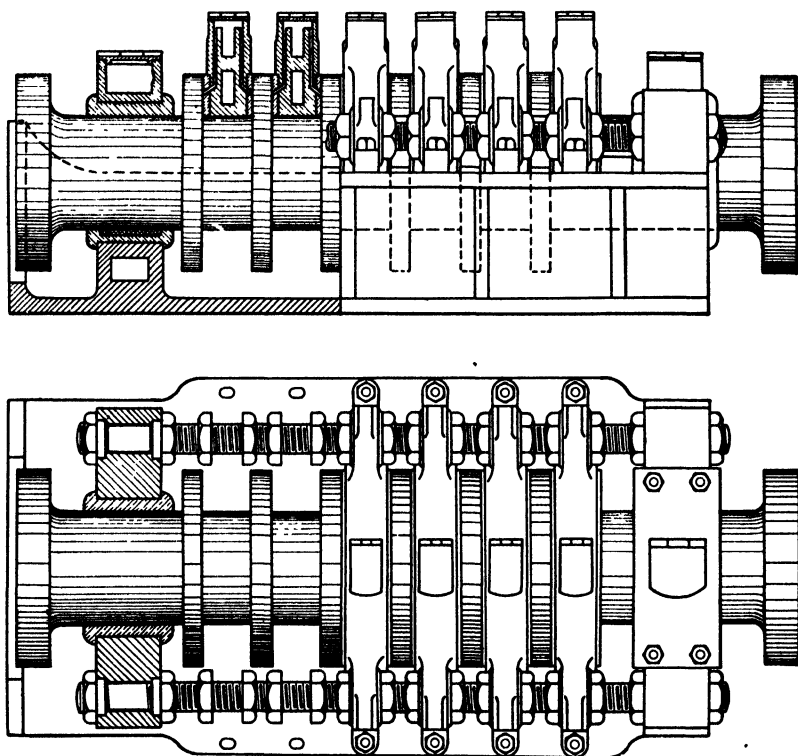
Type of Thrust Bearing in Which Provision Is Made for Taking Up Wear
